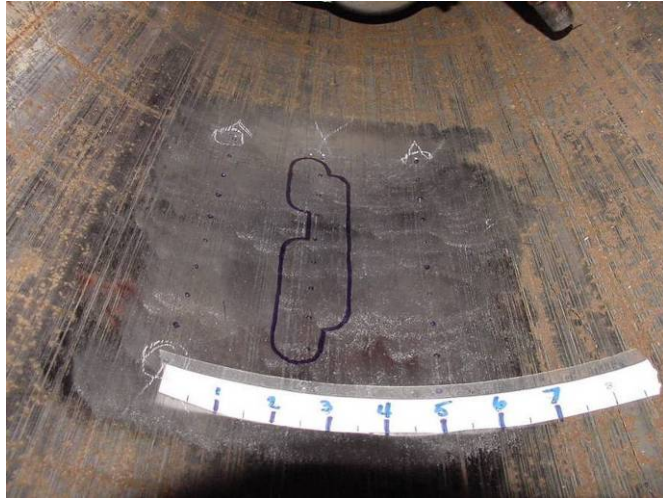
Soil Box for Weld Deposition Repair Test 01
